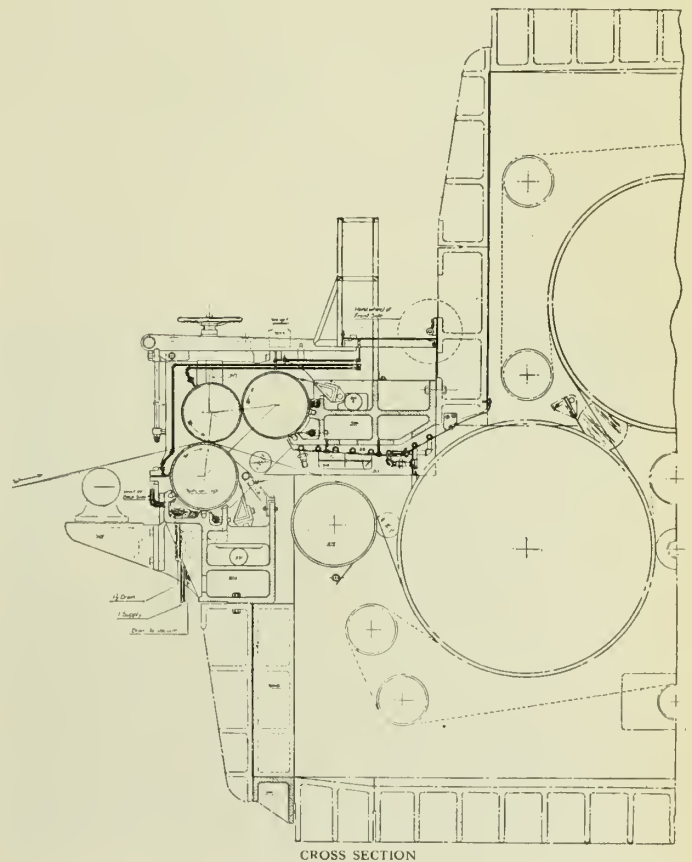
Vacuum Dryer Type 20-60-152, Cross-section showing General Arrangement of Ingoing Seal.
